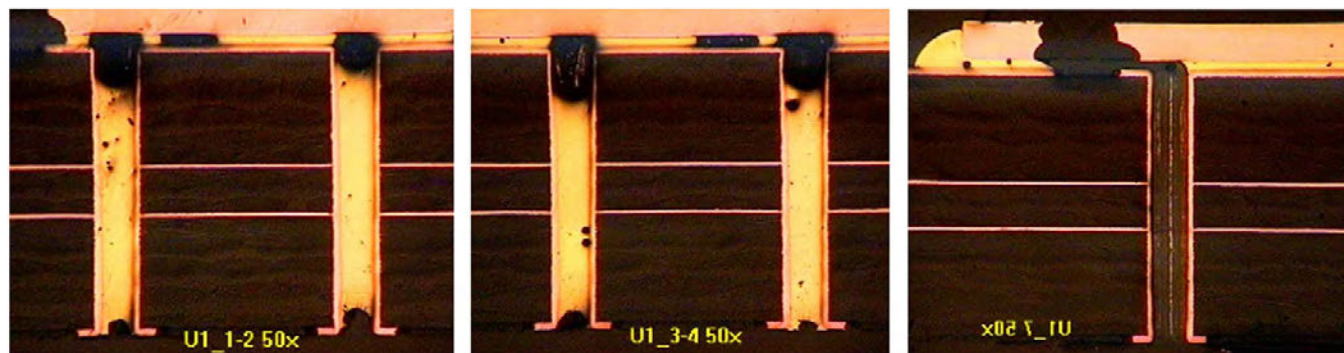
The cross-section of 0.25 mm (10 mil) via using 1.6 mm thick PCB.
